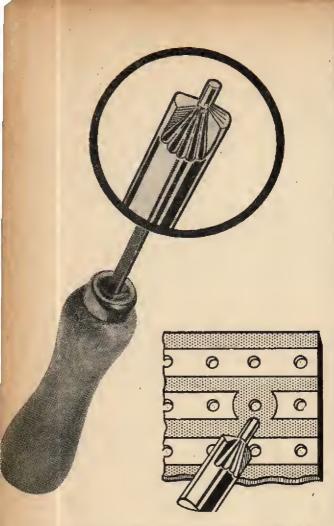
General view of the tool with an enlargement showing the detoils of the cutting edges. The inset drawing shows the effect of using the tool on the copper strip
